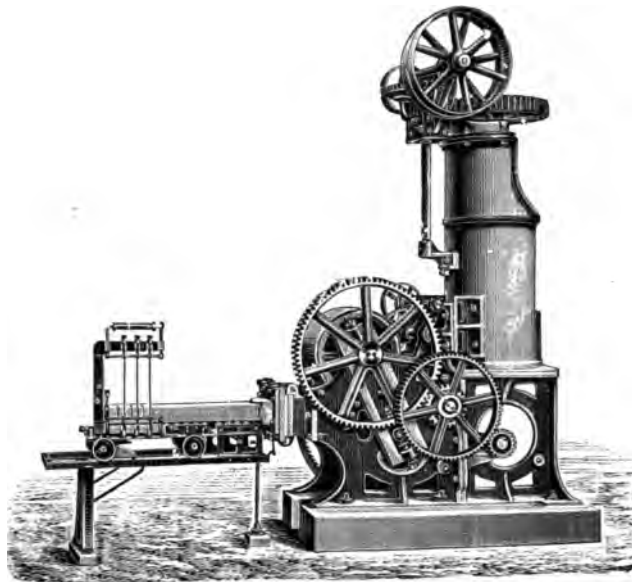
Cylinder Expression Machine combined with Pug-mill (Sachsenberg).
